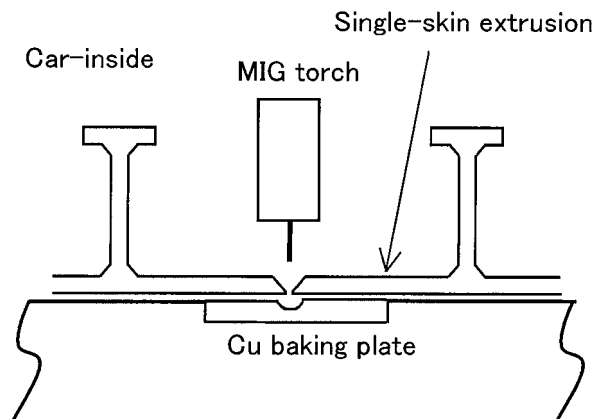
Welding procedure of single-skin extrusion by MIG.
